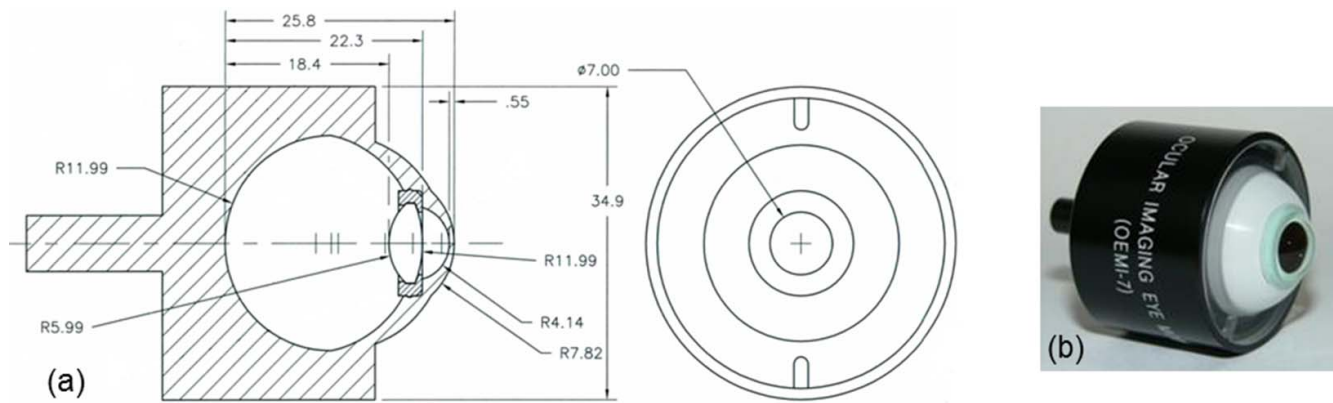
An OEMI-7 model eye from Ocular Instruments, Inc. (a) Engineering drawing, with dimensions in millimeters. (b) Photograph.
